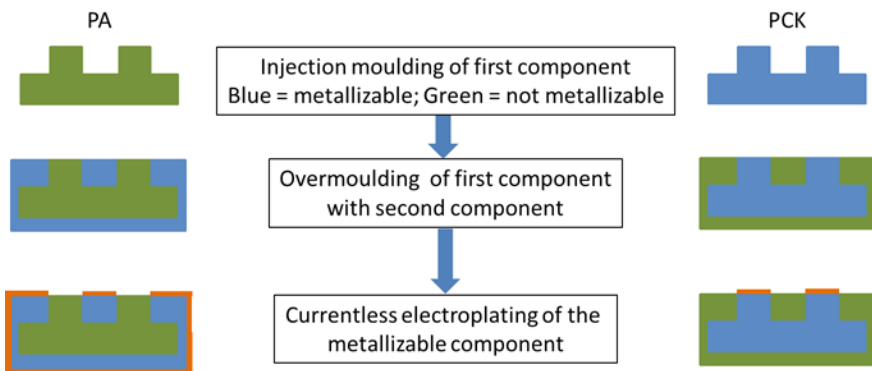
Two variants of the printed board circuit Kollmorgen (PCK) process
